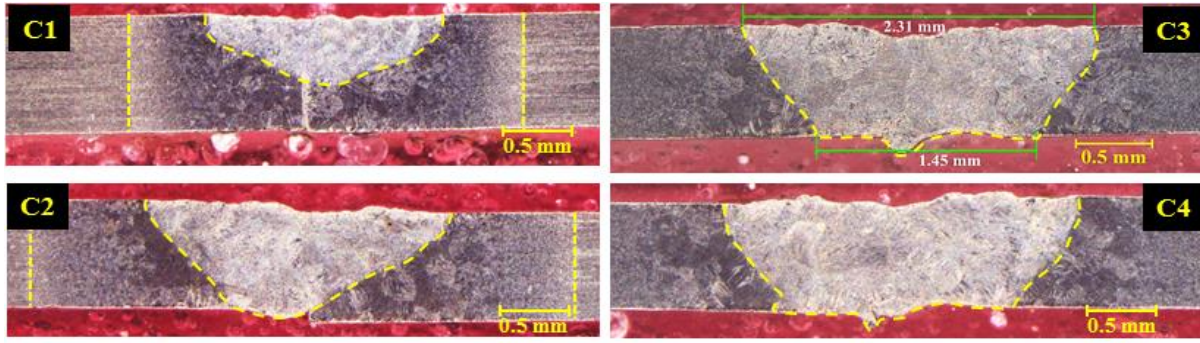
Weld profile at continuous mode of laser welding.
